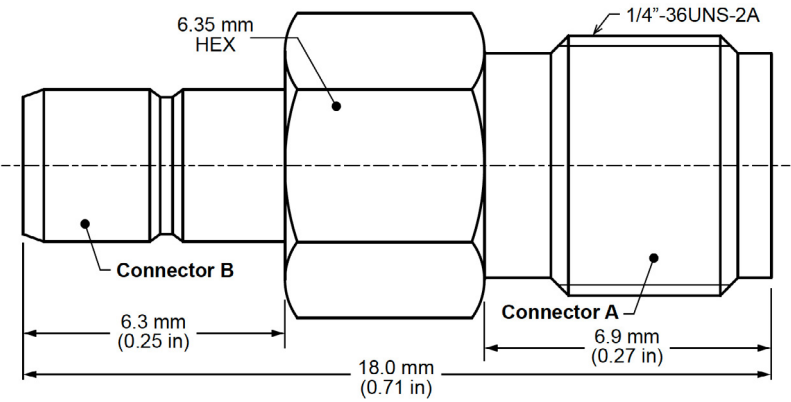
Product Dimensions for the ADP-SMAF-SMBF-G Adapter
